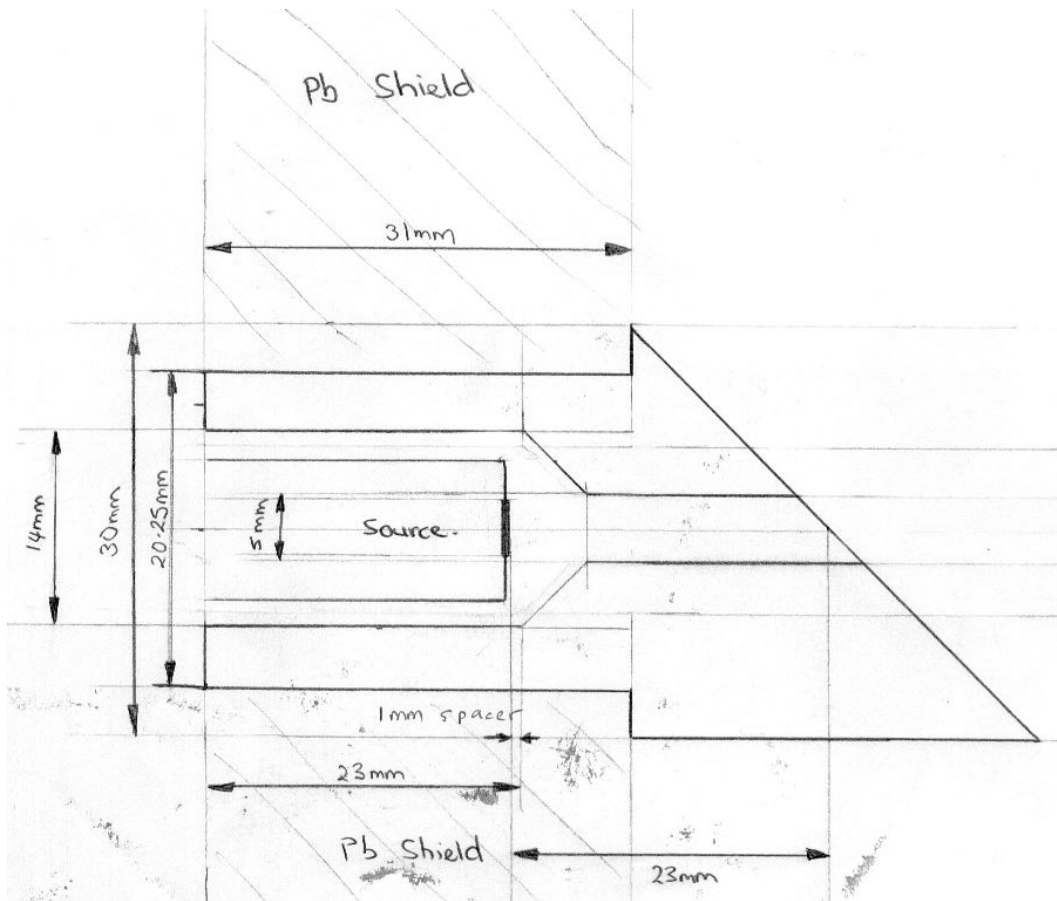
Original design showing the dimensions of the single-circle goniometer assembly.
